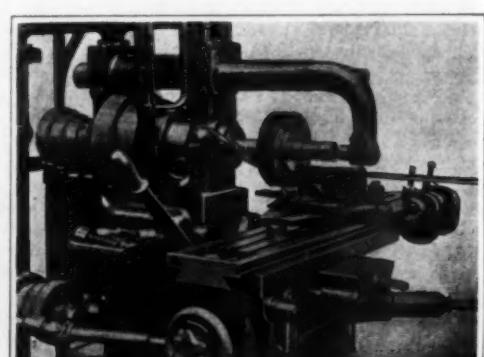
Milling machine fixture used for cutting off calking strips.
